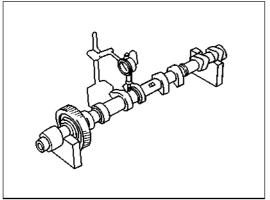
5 - 57 Check the Camshaft And Bearing
